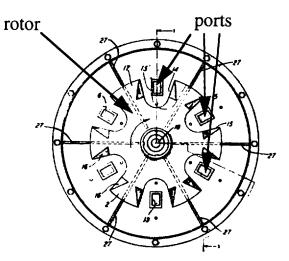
A sketch showing the shape of the rotor and its position with respect to the six ports, one of which is indicated by the number 13.
